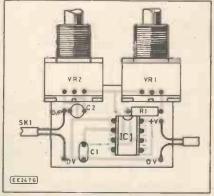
P.c.b. design and component layout of the Simple Audio Generator.
